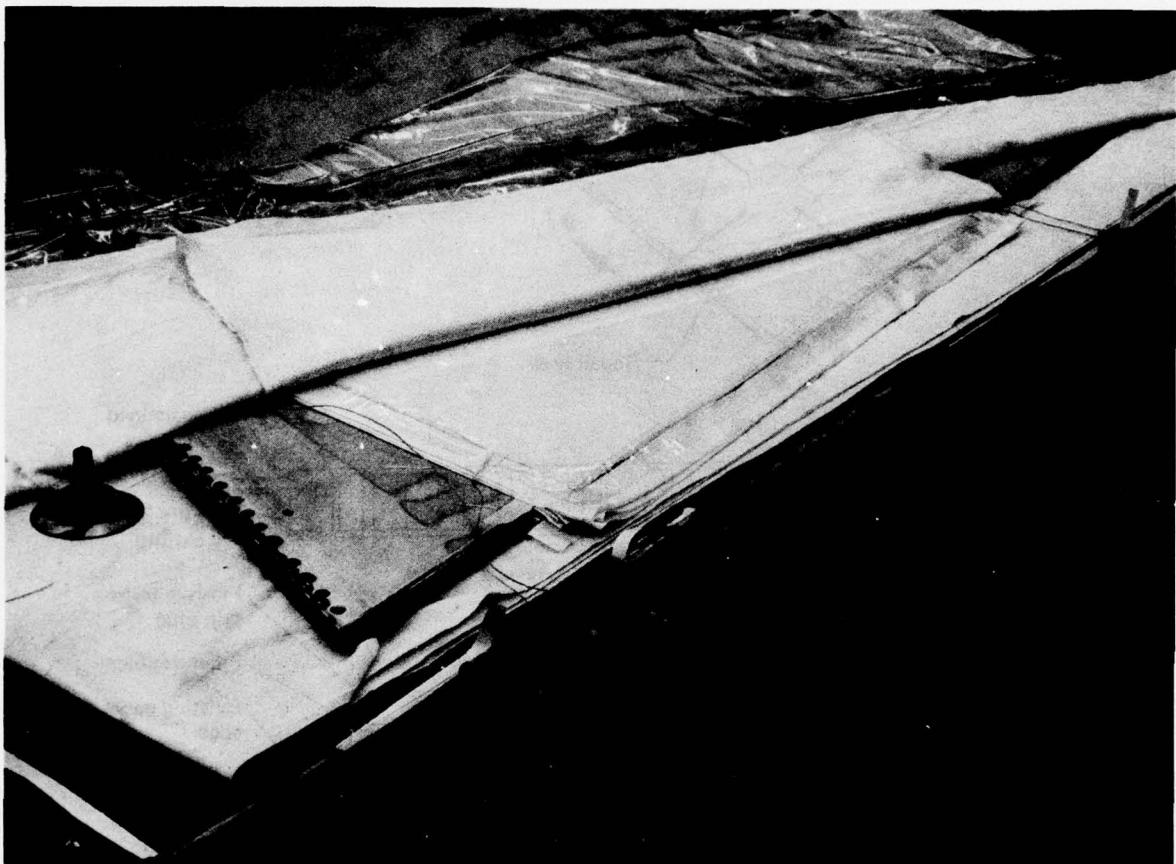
Fin Panel and Fiberglass Bond Assembly Jig Being Bagged for Cure
